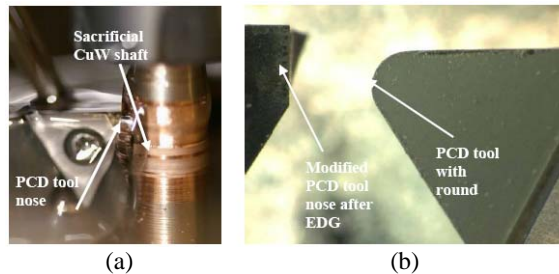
(a) On-machine EDG on PCD cutter, (b) PCD cutter before and after modification using EDG.
